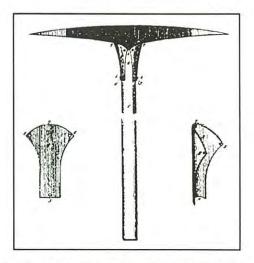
George Schoettle patented a practical twopiece sleeve for mounting Pittsburgh Pattern pickheads in Collinsville, Illinois in 1890. The corners of each plate had holes for screwing to the handle. (Pat. 458,528)
